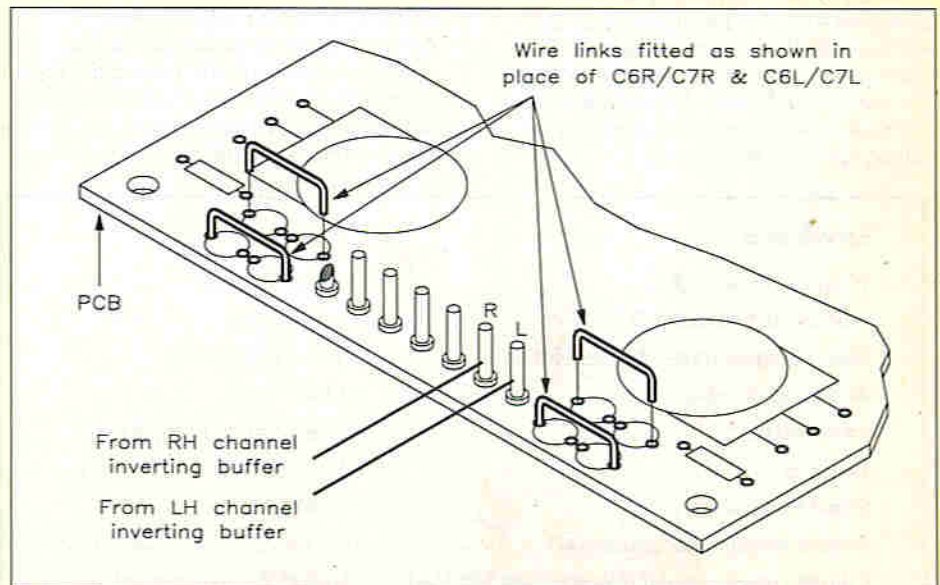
Modifying Dual Stereo Tone Control PCB to accommodate the inverting buffer.
